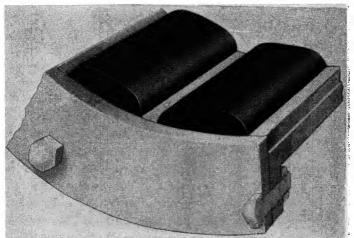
Section of a segmented-type rubber bearing showing flanged end secured with bolts.
